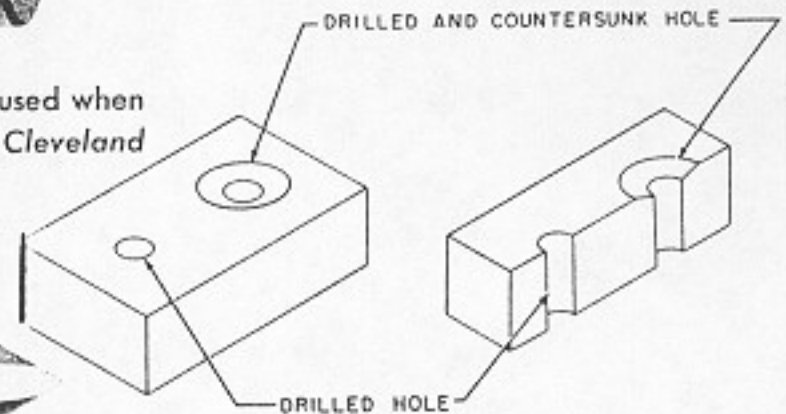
Holes are generally countersunk to fit the heads of rivets, screws, or bolts.
